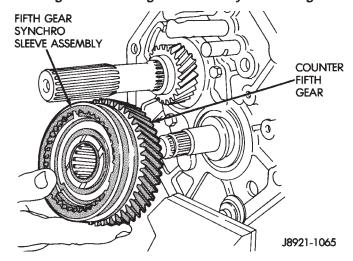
Removing Counter Fifth Gear And Synchro Assembly
